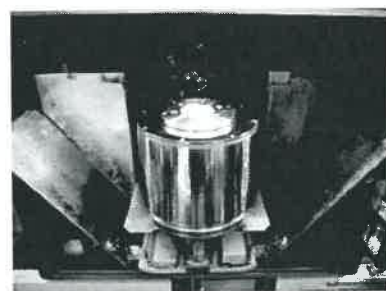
Photograph of Pt/C coated aspherical molding die after opening the vacuum chamber.
